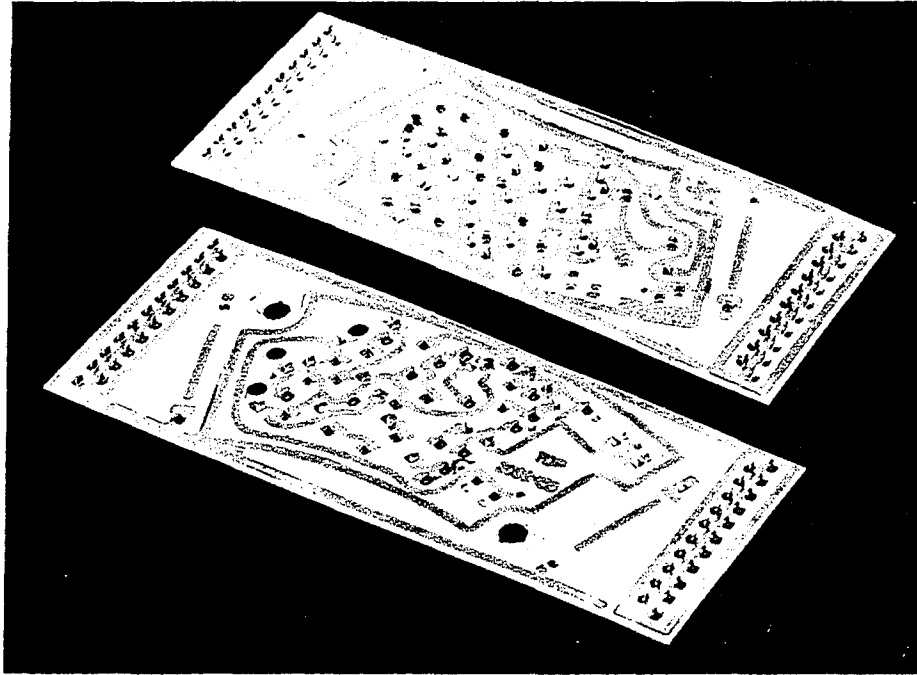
Here is a pair of boards that demonstrates test tabs used for checking adhesion of the nickel to the board and more test tabs used for setting weld schedules. On the surface, these sound like good ideas, but when you consider that a large part of our cost is in lifting tabs, it may be a rather expensive way to make tests.
